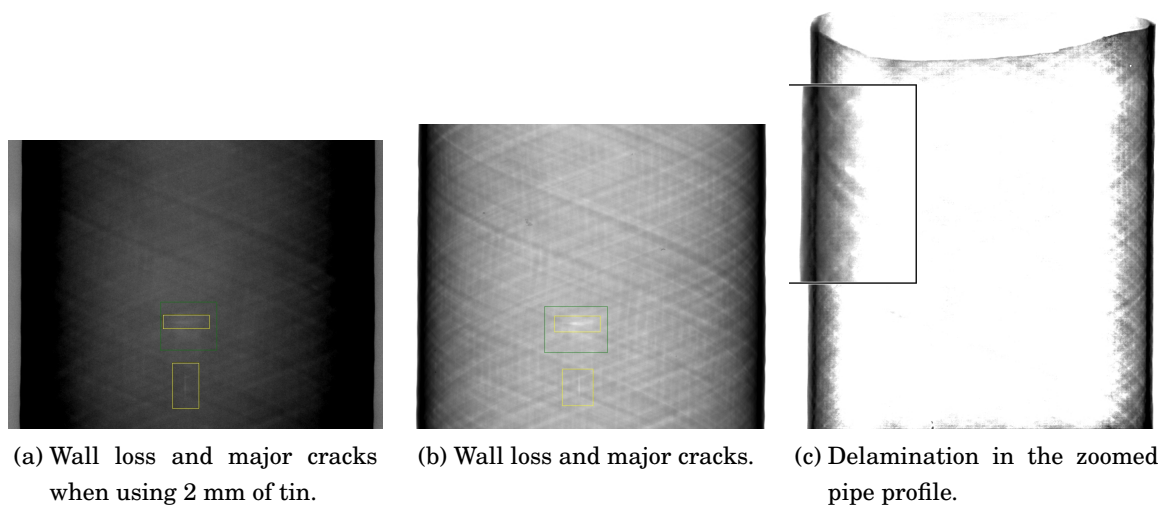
DRT of U\_GRP\_2 pipe. Wall loss, major cracks and delamination.
